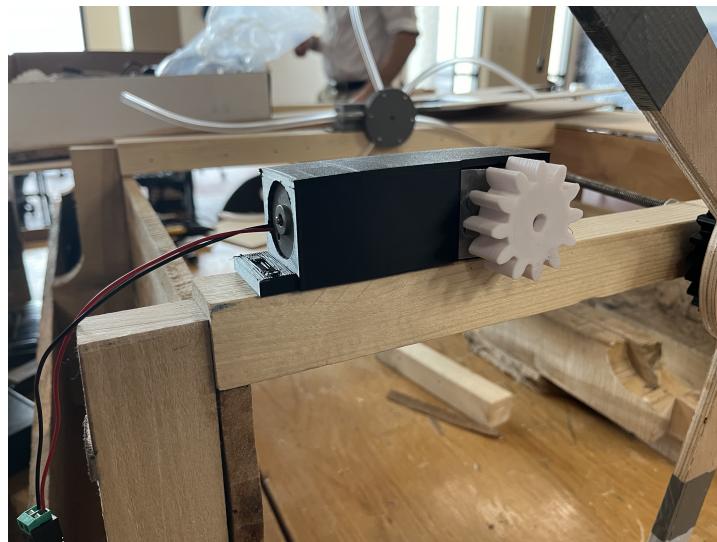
First prototype of the 3D printed motor box for the first and third blade
